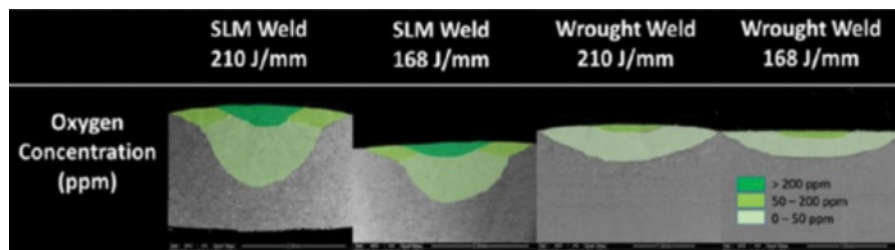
Measured oxygen concentration in gas tungsten arc welds made in L-PBF and wrought 304L stainless steels (Ref. 40).
